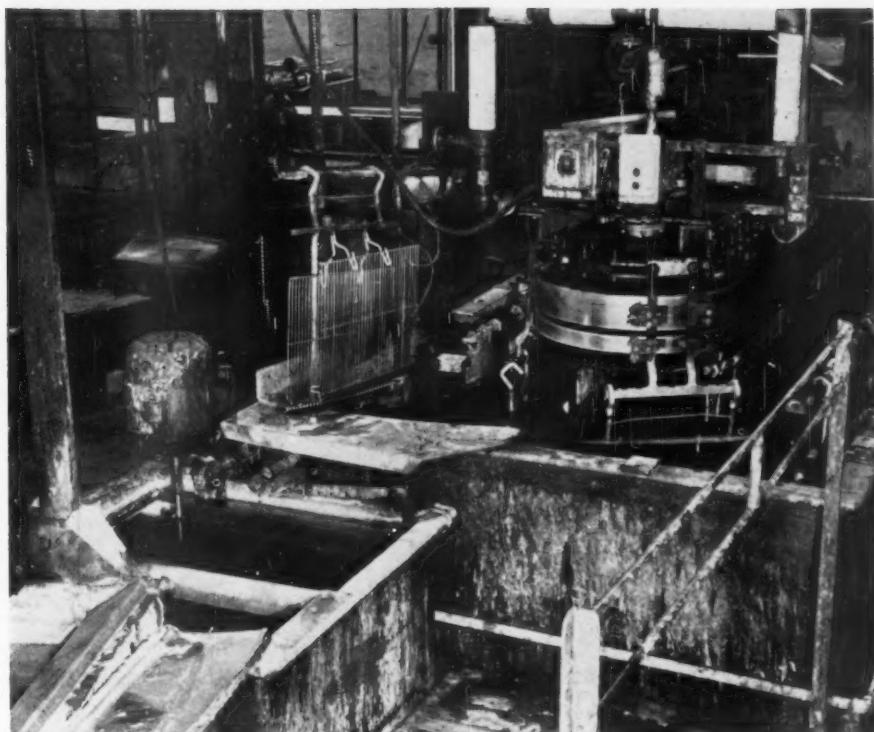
Load end of glycolic electro-polishing machine. Rinses are on the left side.
